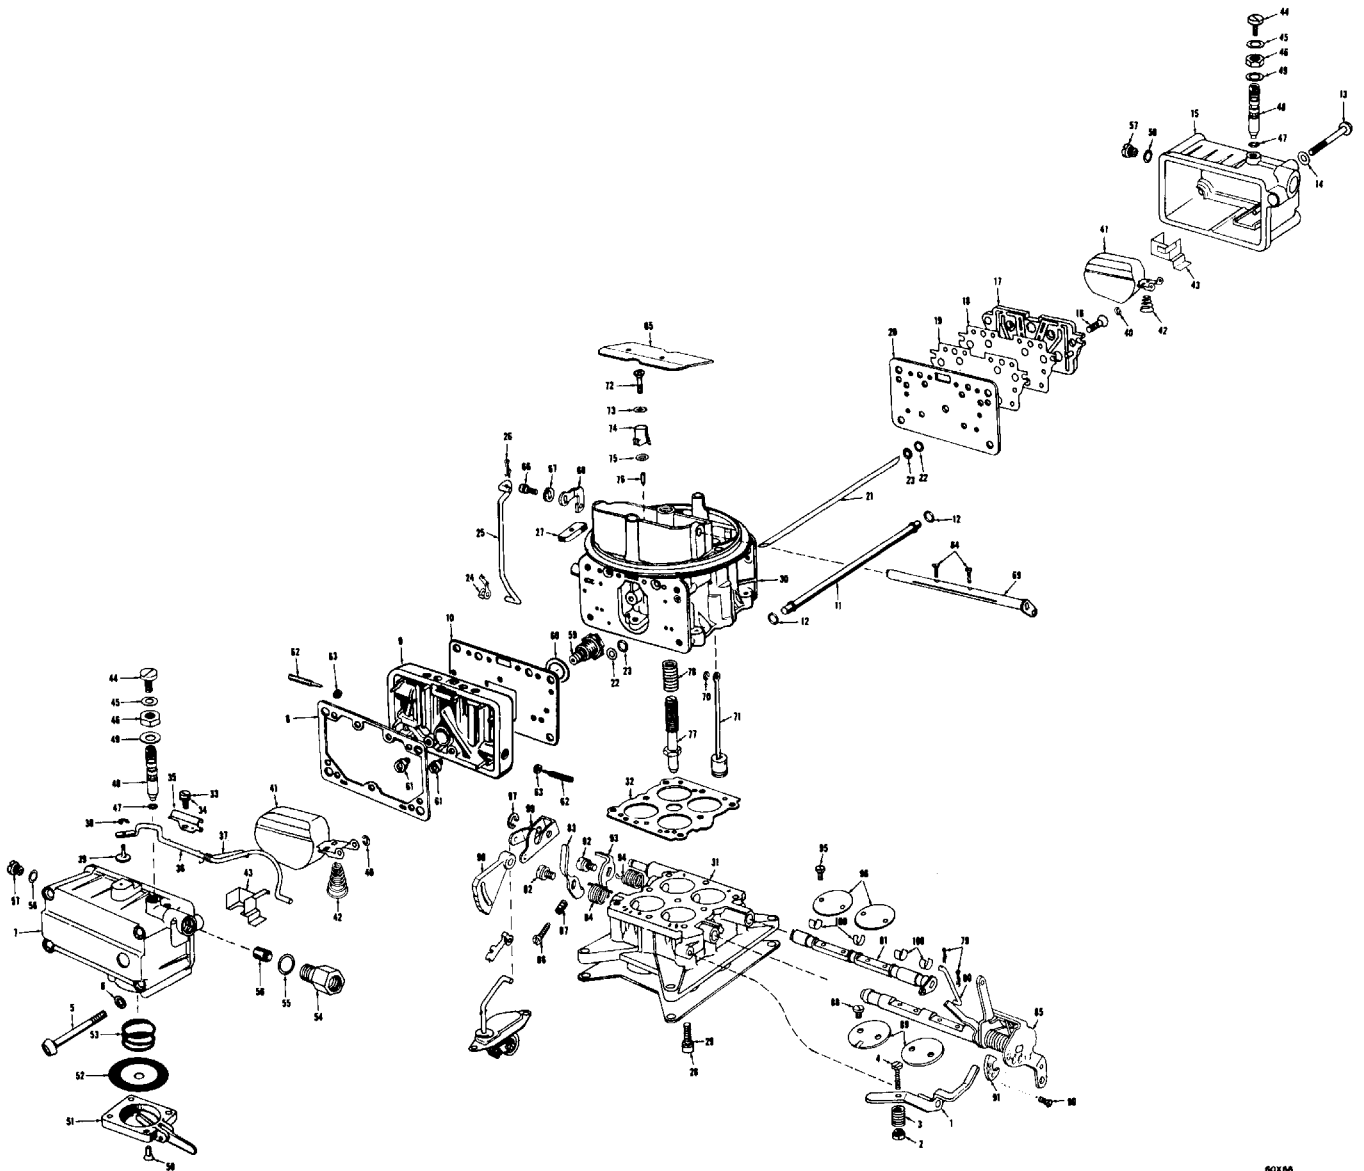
Carburetor Assembly (Exploded View) R2052A & R1971A
